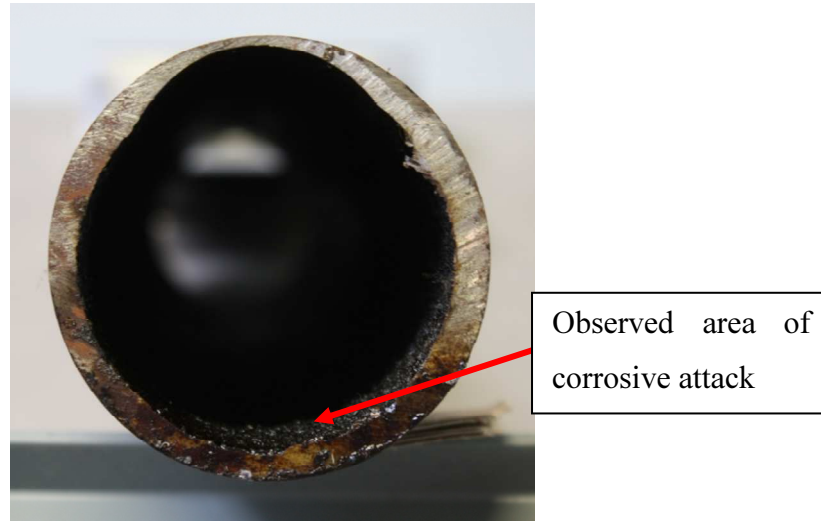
Macroscopical investigation of layer formation for unworn side of the carbon steel tube of real application [cf. 74]
